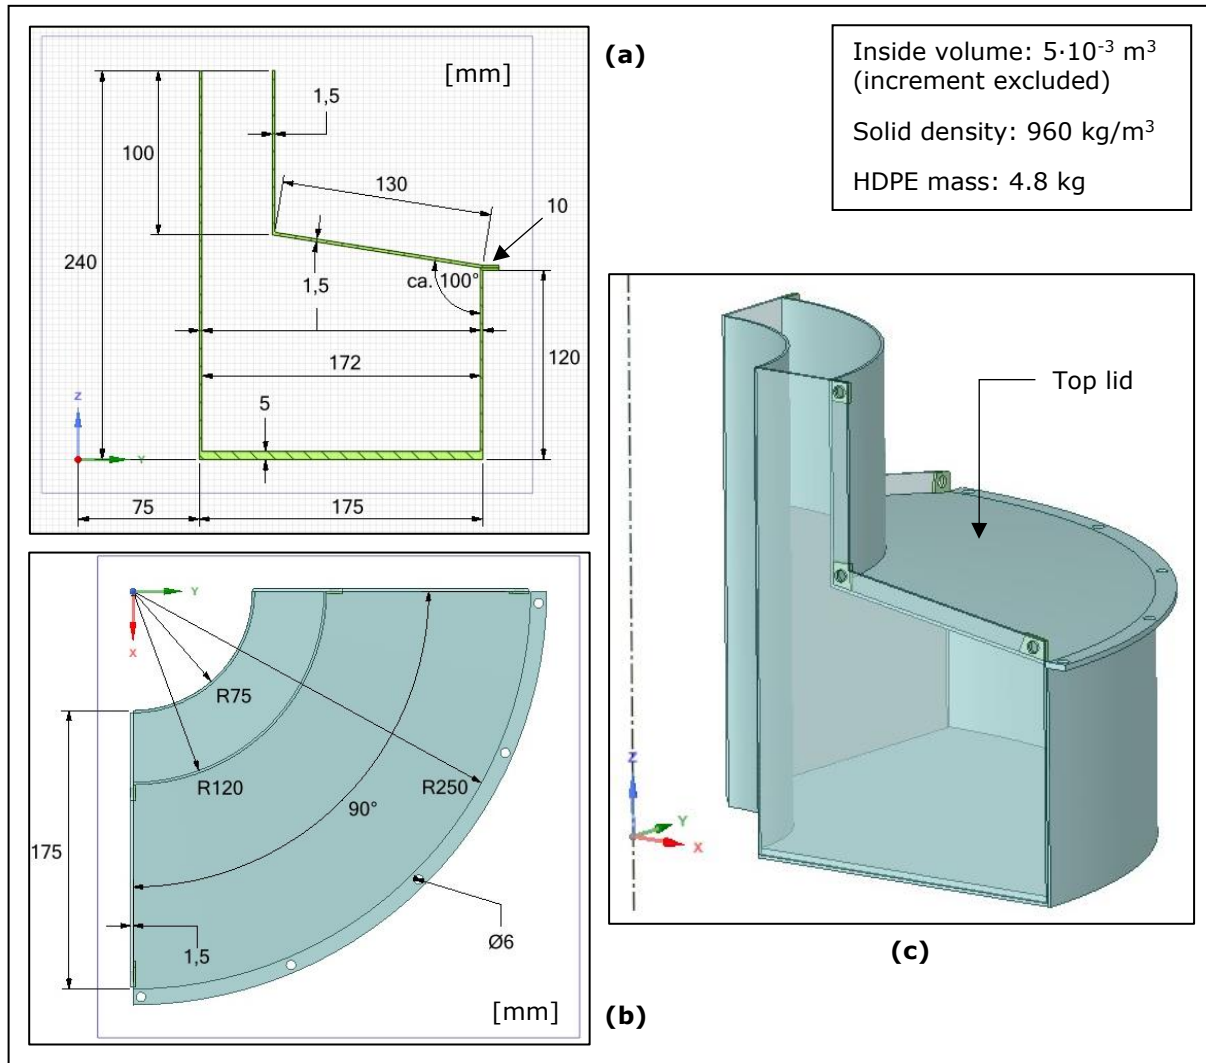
Test rig container; (a) cross-sectional dimensions; (b) radial dimensions viewed from top; (c) 3D model
